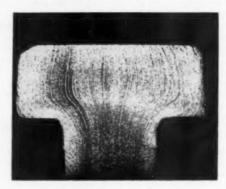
Etched section of cold-headed bolt blank showing grain structure
